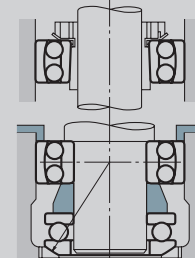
Bearing Mounting Arrangements and Bearing Types
